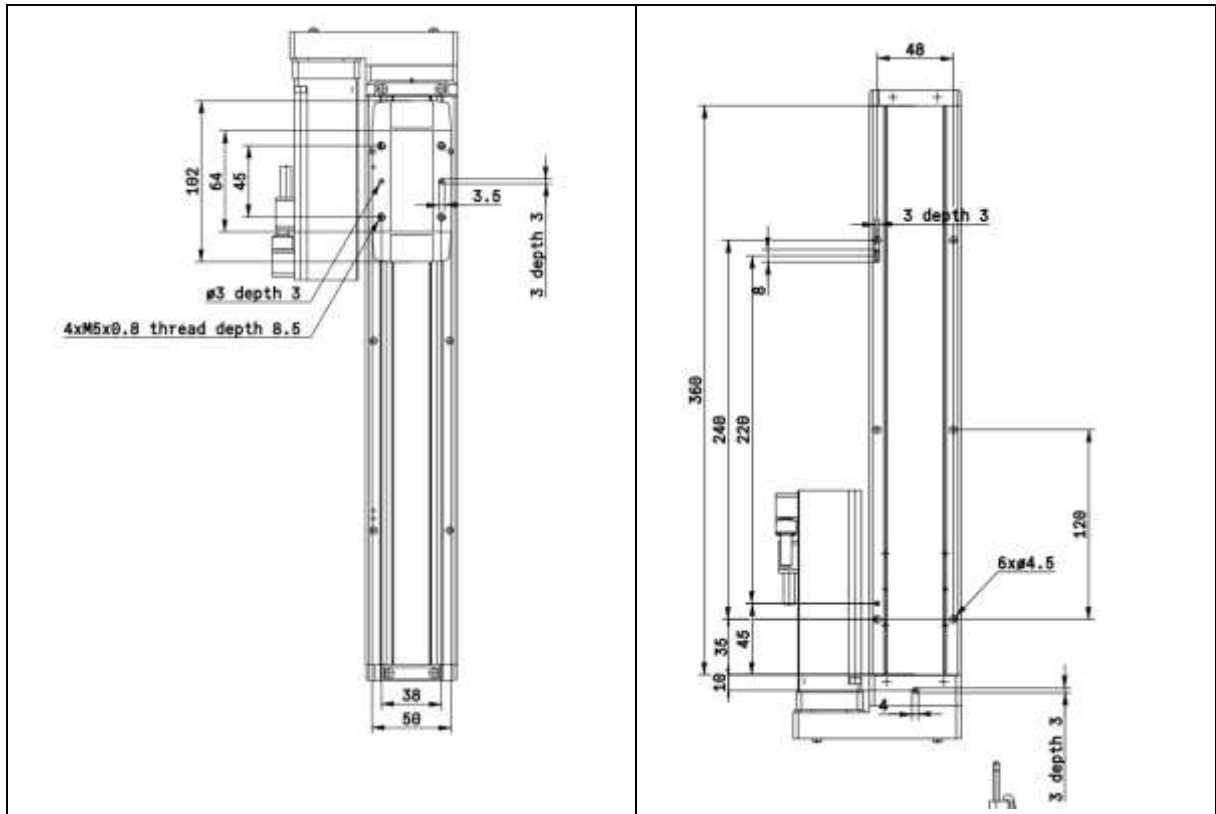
Dimensions of robot axis LEFS25RV6H-250BK-R5M21
